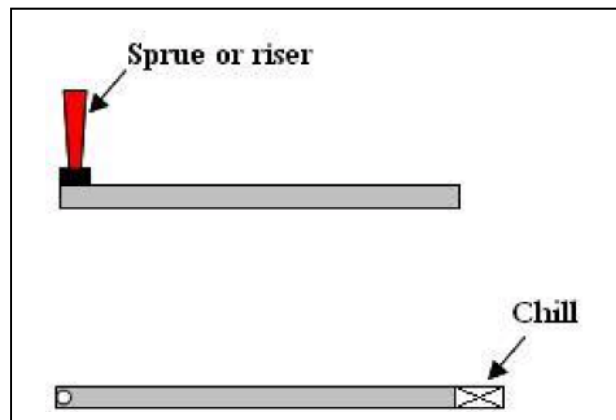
Drawing of 15" bar casting indicating riser and chill placement.
